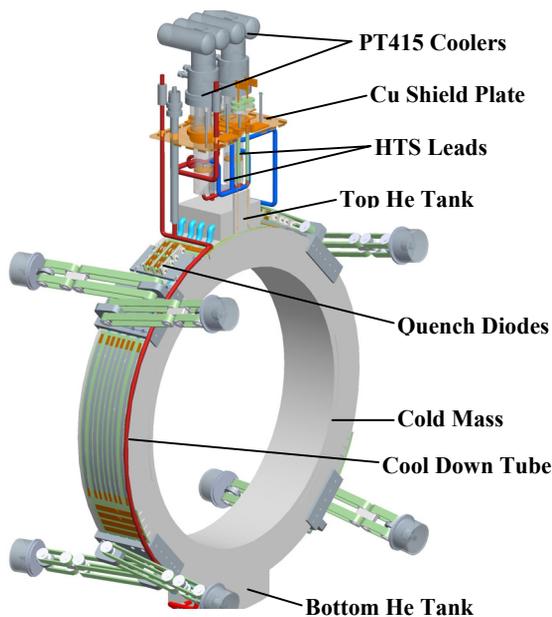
A 3D View of the Coupling Magnet Cold Mass.
